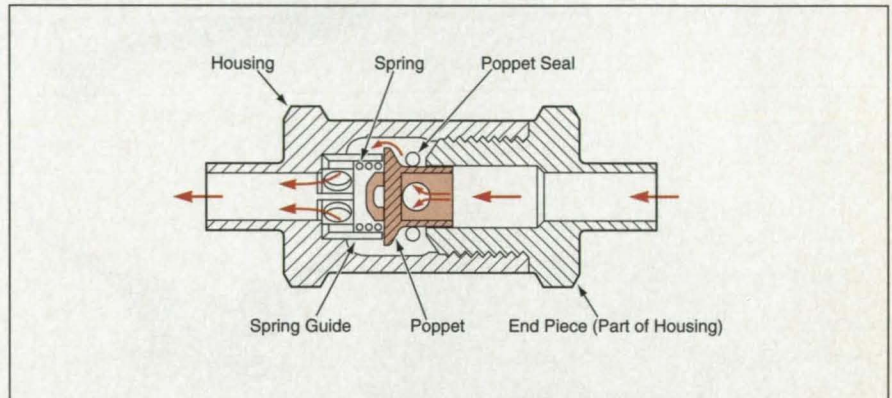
In the Unmodified Design, sliding of the poppet in the housing causes wear, and the sliding parts are susceptible to jamming by solid particles.
